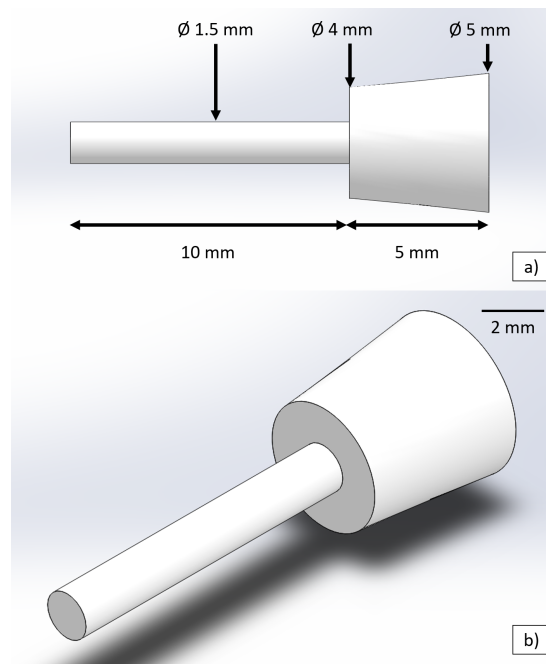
CAD representation of a port designed to connect 4 mm outer diameter tube. a) Shows the dimensions of the port. b) Shows a 3D representation
